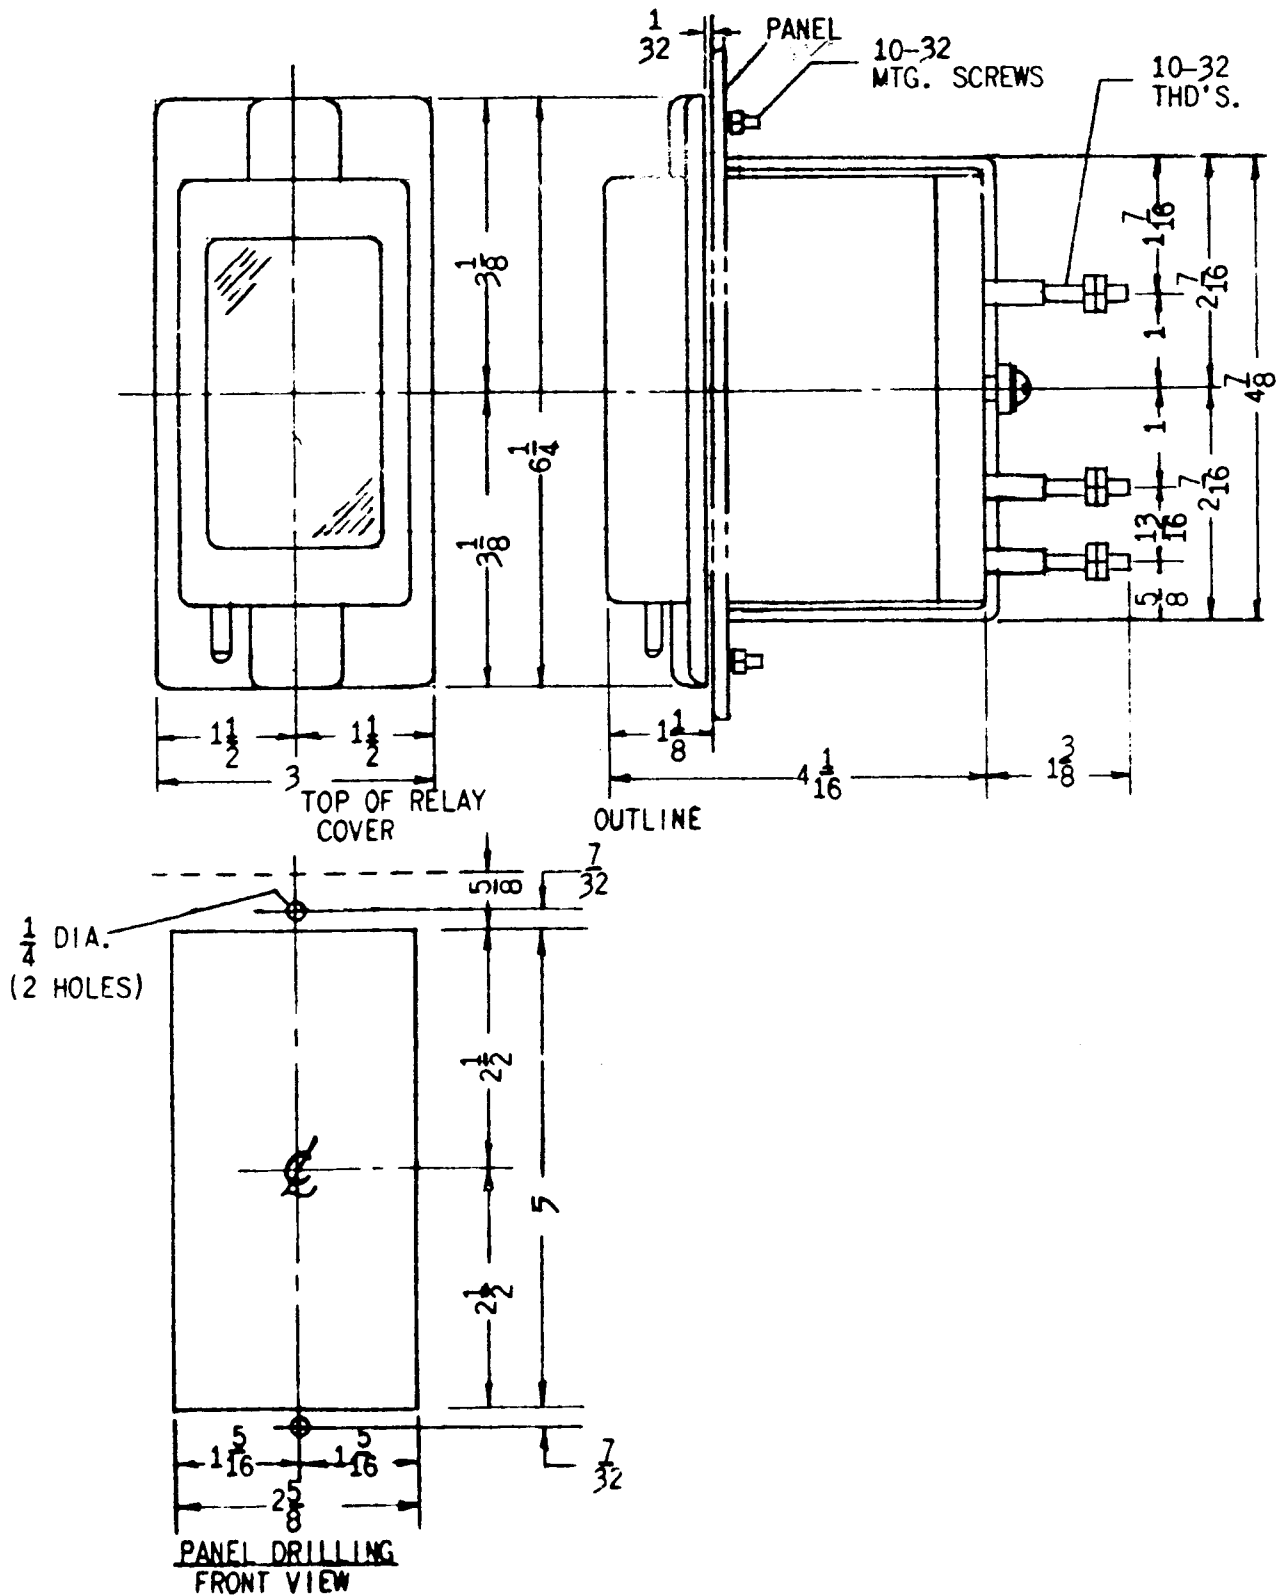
(0127A9555 [3]) Outline and Panel Drilling Dimensions
